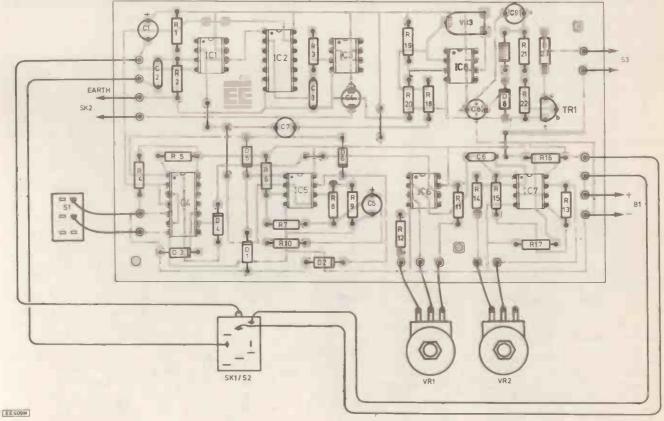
Printed circuit board component layout and interwiring details for the case mounted components.
